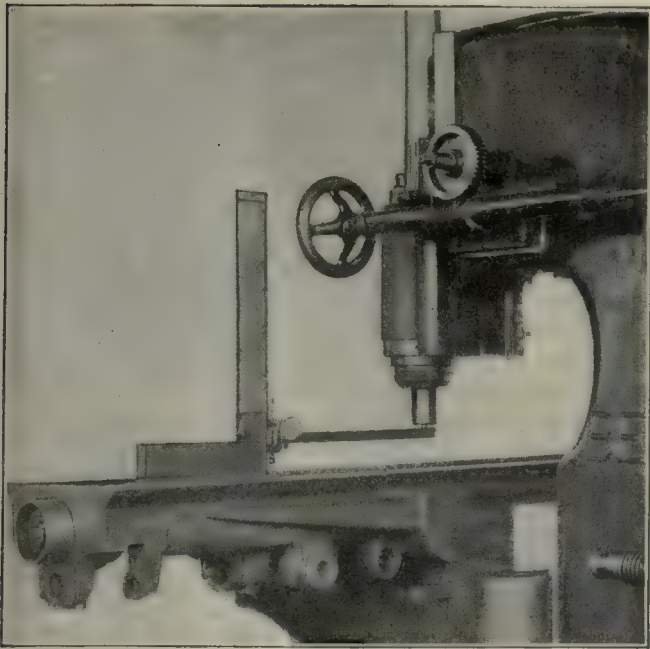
TESTING ALIGNMENT OF SPINDLE-SLIDE GUIDE WITH COLUMN GUIDE
